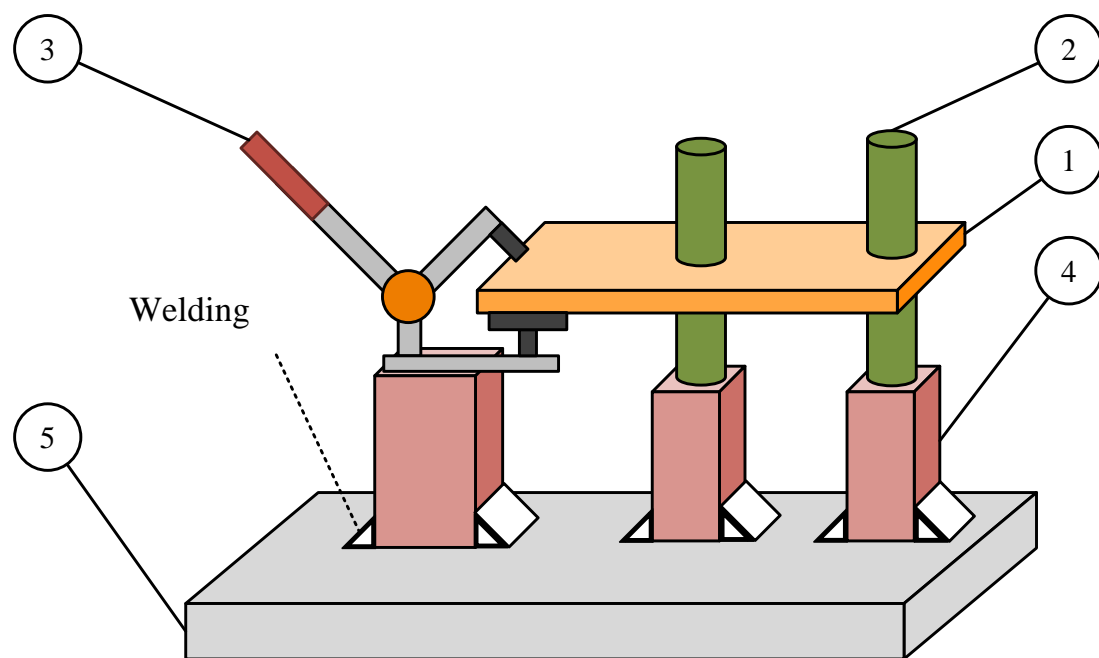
Typical fixture elements in a dedicated fixture: (1) workpiece, (2) locator or unit, (3) clamp, (4) fixture body, (5) frame
